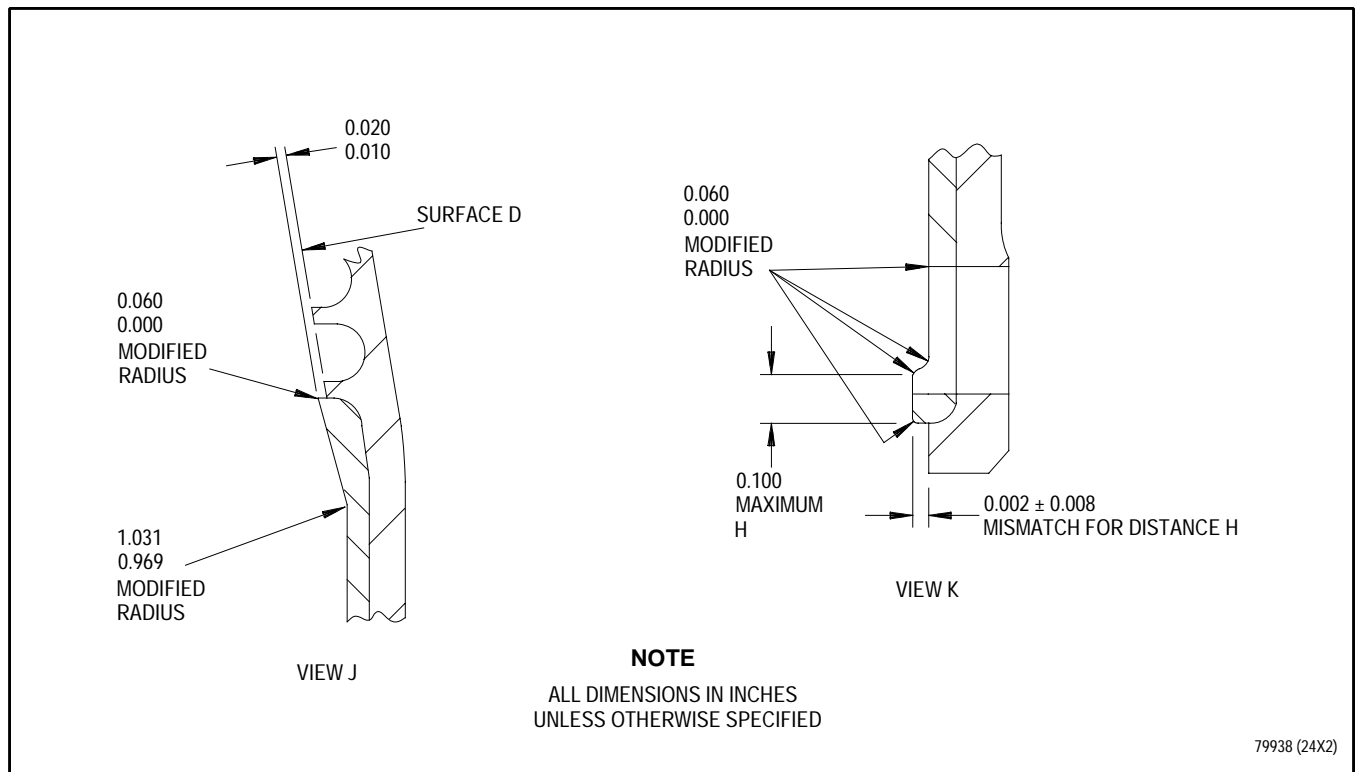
First Stage Fan Air Seal - Silicone Rubber Finish Machining (Sheet 2 of 2)
